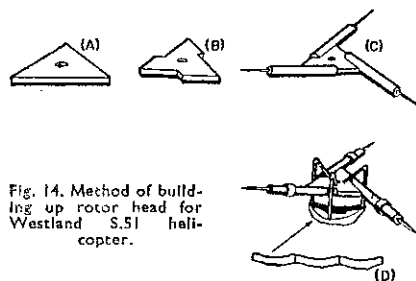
Method of building up rotor head for Westland S.51 helicopter.
